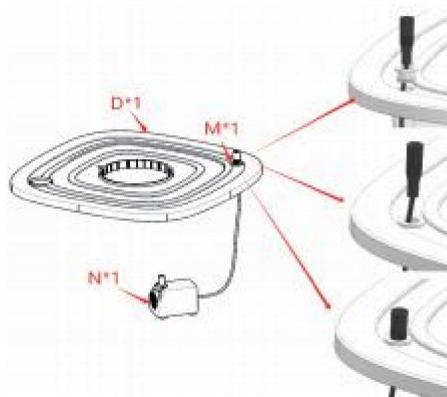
; Use the holding coil to install the female port of the pump into the small hole in the lid of the water storage bucket as shown.
